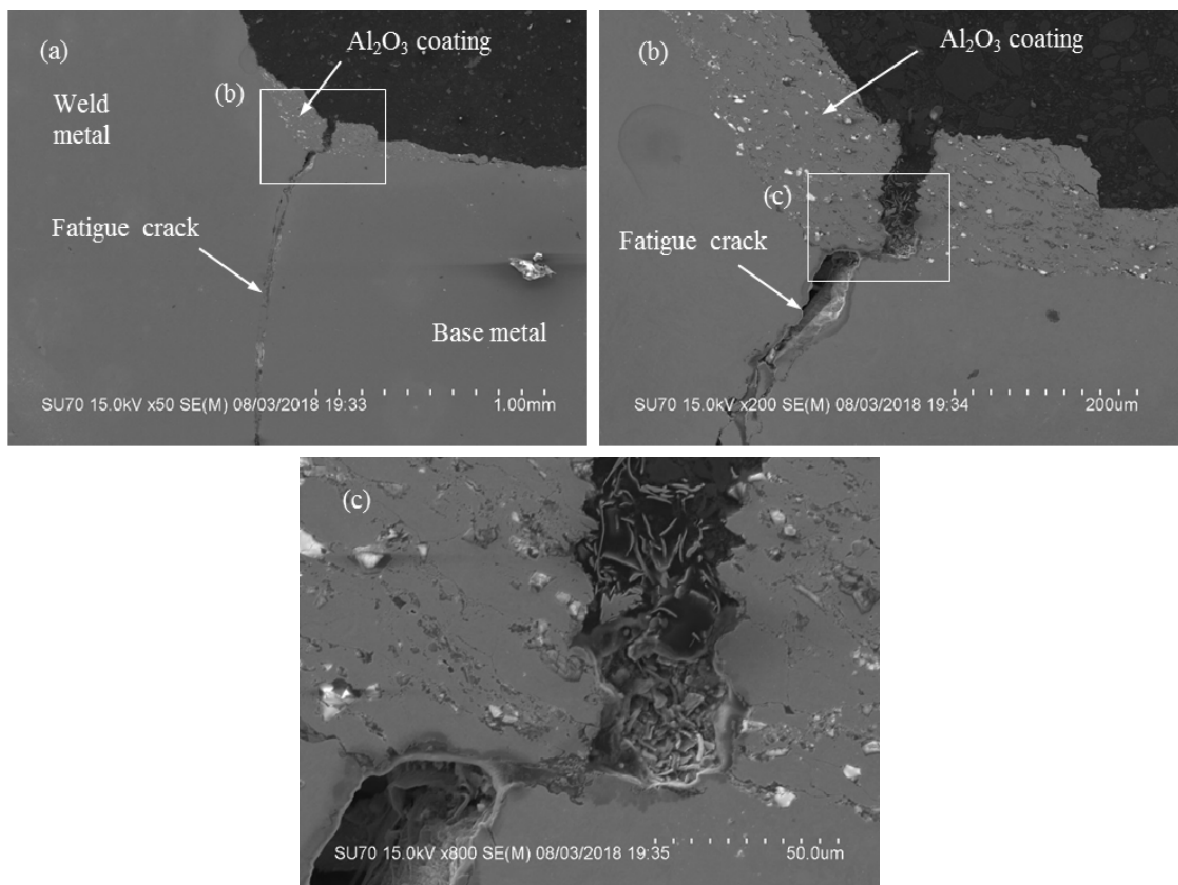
Fatigue crack of CS-Fe+Al₂O₃ welded joint after fatigue test. (a) Cross section of the welded joint, (b) higher magnification of (a), (c) higher magnification of (b).
